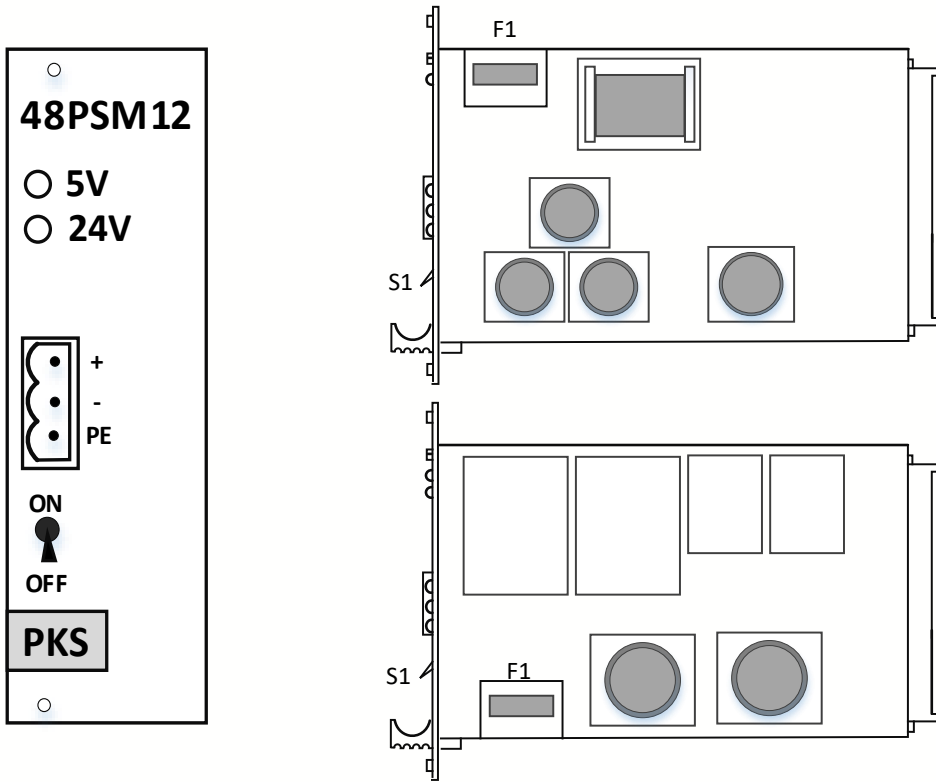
Board Layout and Fuse Position (R0001,R0002)
